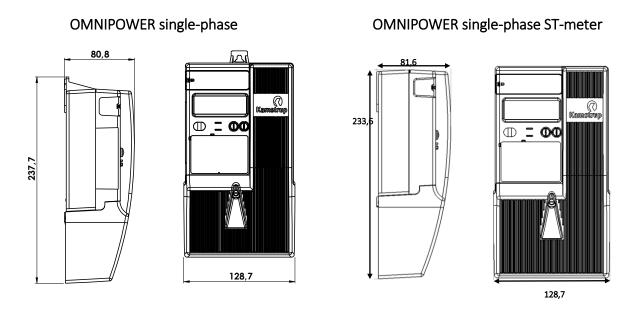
Dimensional sketch of OMNIPOWER single-phase meter with/without breaker.
